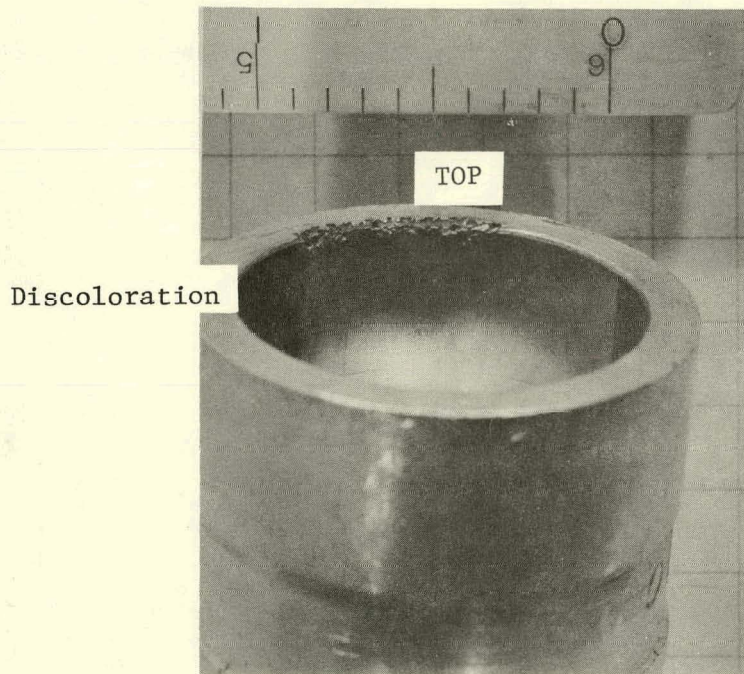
Ring Showing Pitting and Discoloration Except at Top of Ring
